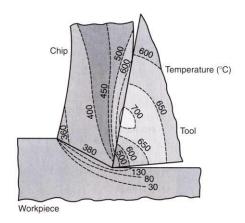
Typical temperature distribution in the cutting zone. Note the severe temperature gradients within the tool and the chip, and that the workpiece is relatively cool. *Source:* After G. Vieregge.
